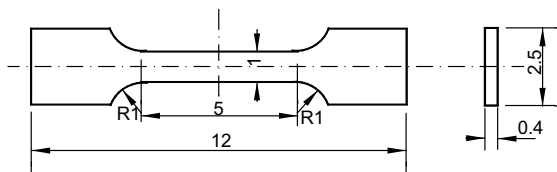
Sketch showing the dimensions of a tensile specimen.
